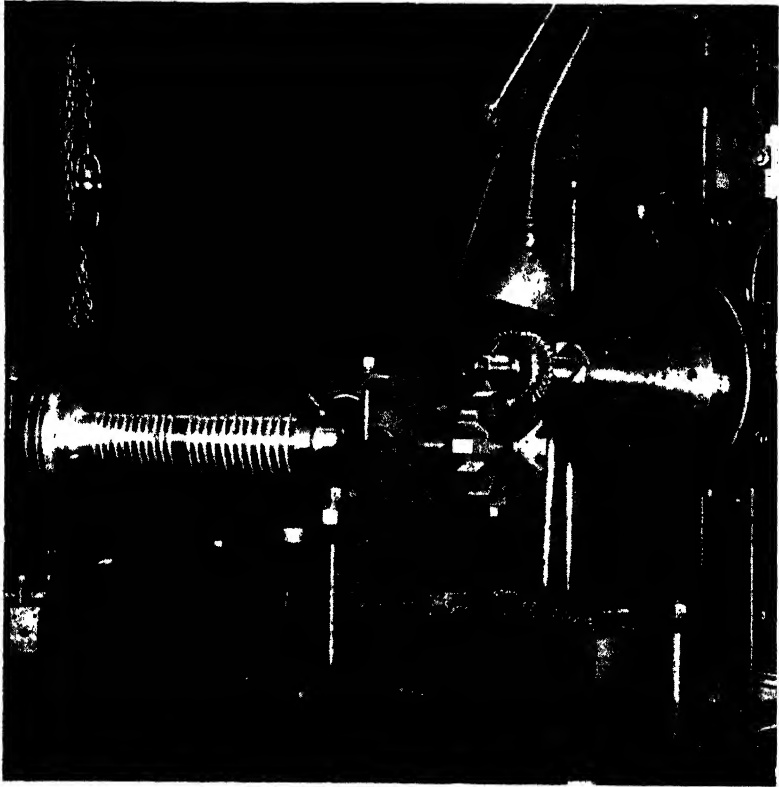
Milling Keyway in Large Propeller Shaft by the Application of a Portable Boring, Drilling and Milling Machine
